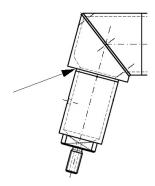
Pay special attention to the radius indicated by the arrow during dye penetrant inspection.
